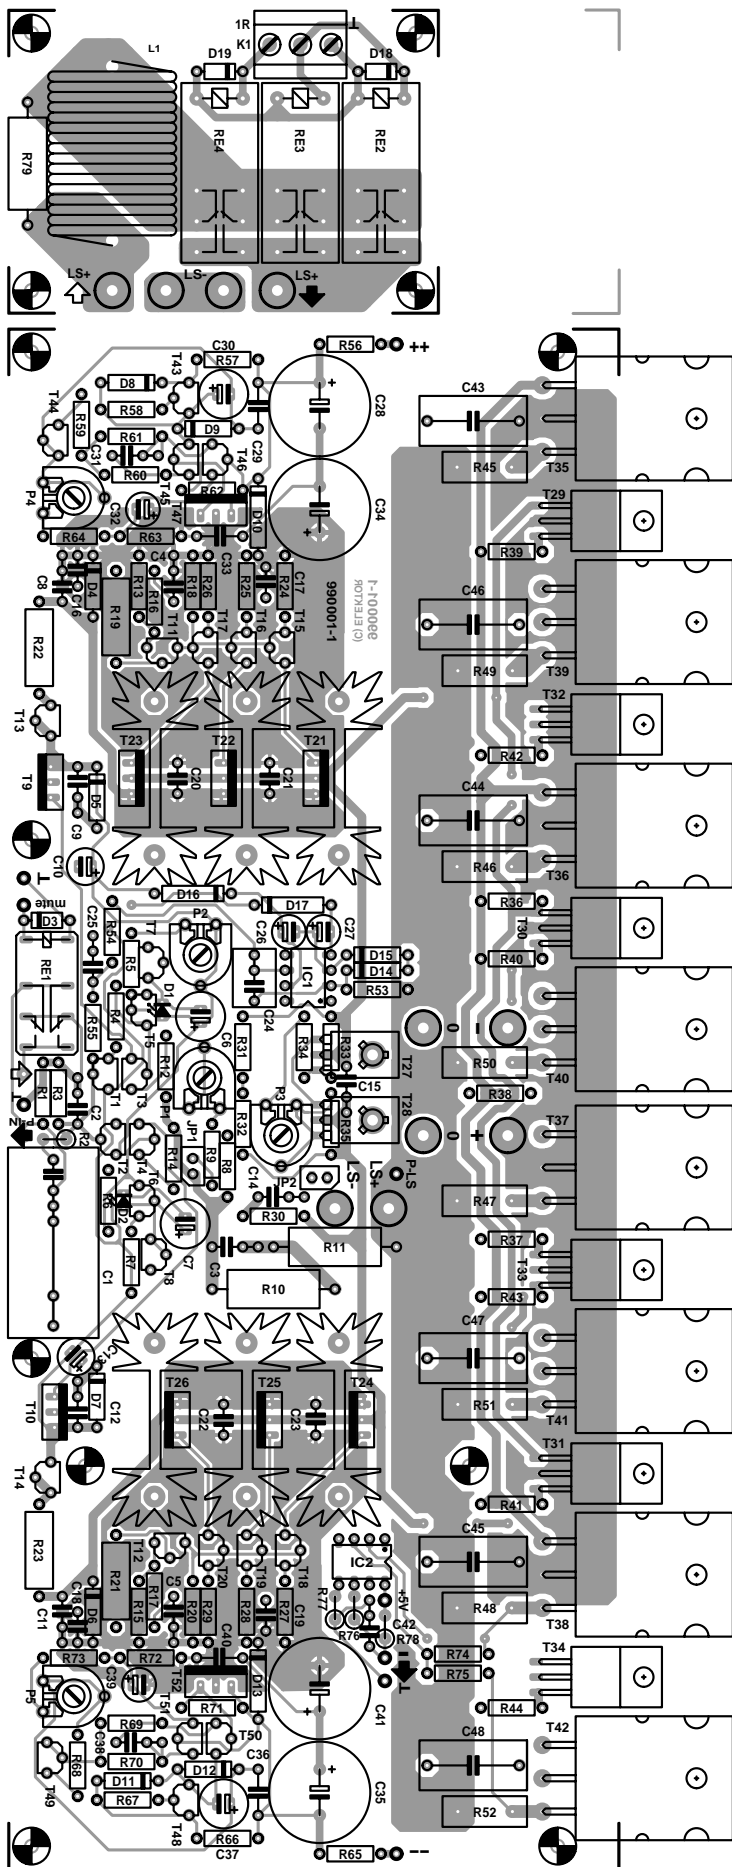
The double-sided printed-circuit board is intended to be combined with the heat sink into a single entity. Before that can be done, however, the section for the output relay and the inductor must be cut off the main section.
